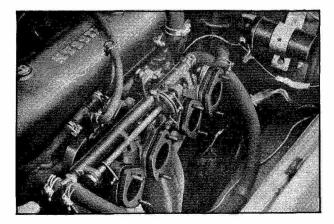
2. Remove Intake manifold to Cylinder head stud nuts.
